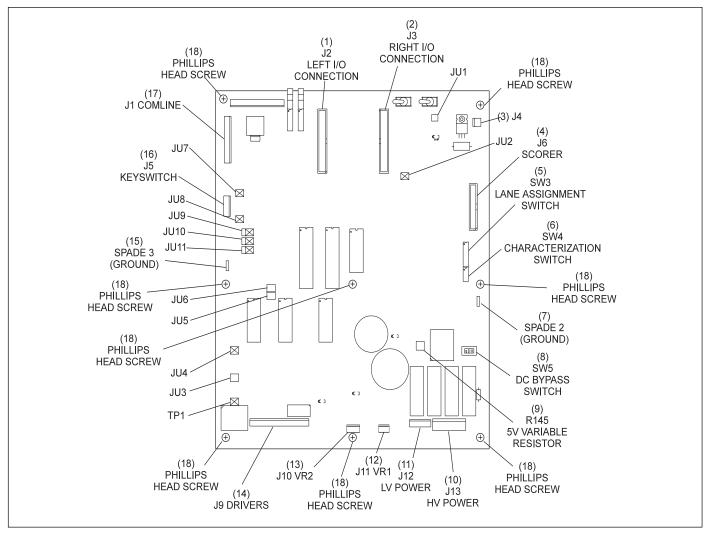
Consolidated Low Voltage Box CPU PCB Removal.
